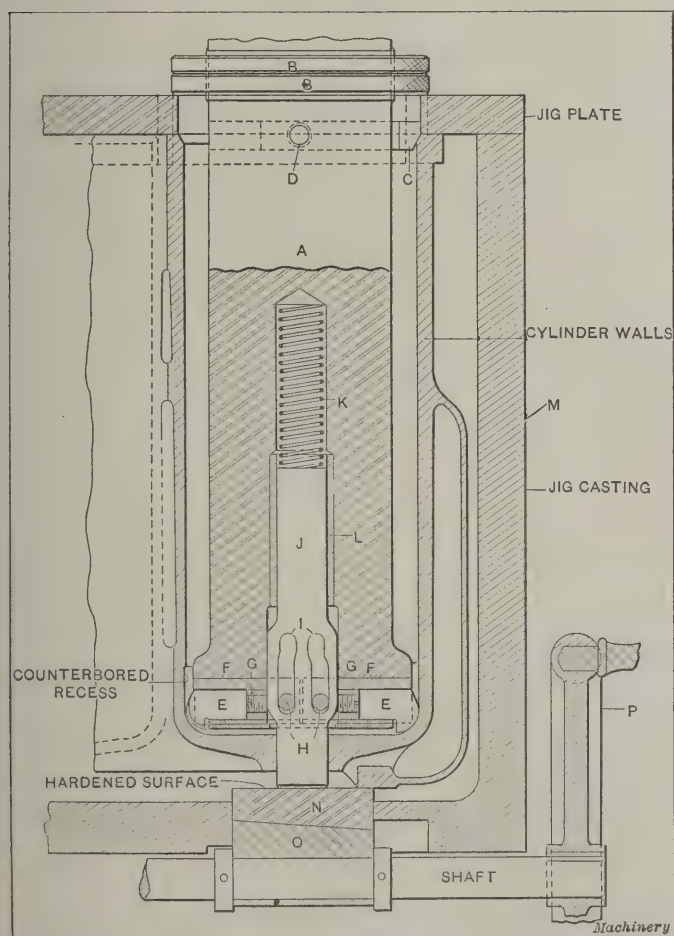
Showing the Cylinder in the Fixture and the Counterbore at Work
